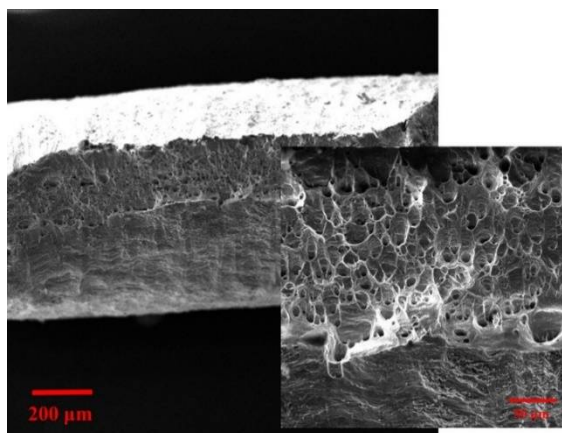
Tensile fracture surfaces of 5052 Al alloy
